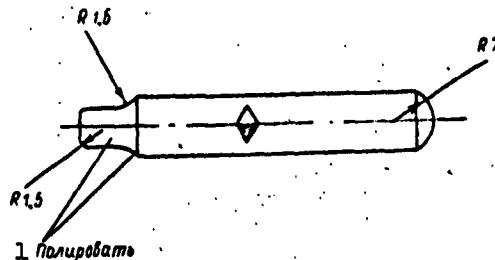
Mandrel for extracting the outer ring of the ball bearing. 1) To be polished.
